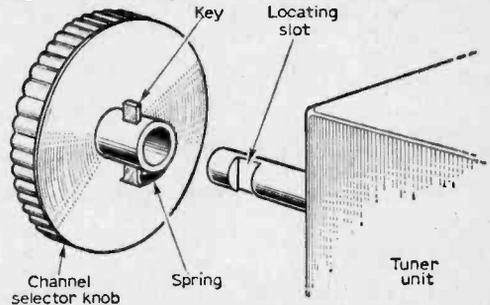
The channel selector knob of the T380 group of receivers. The key should be pressed down with a knife blade to release the knob.
